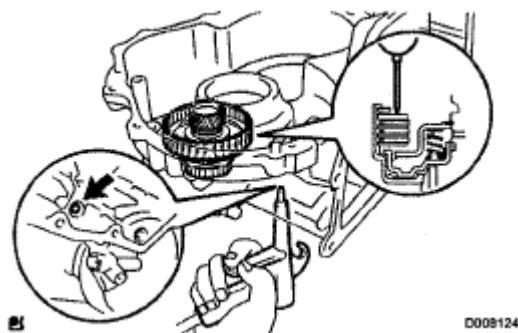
Measuring Underdrive Clutch Pack Clearance
